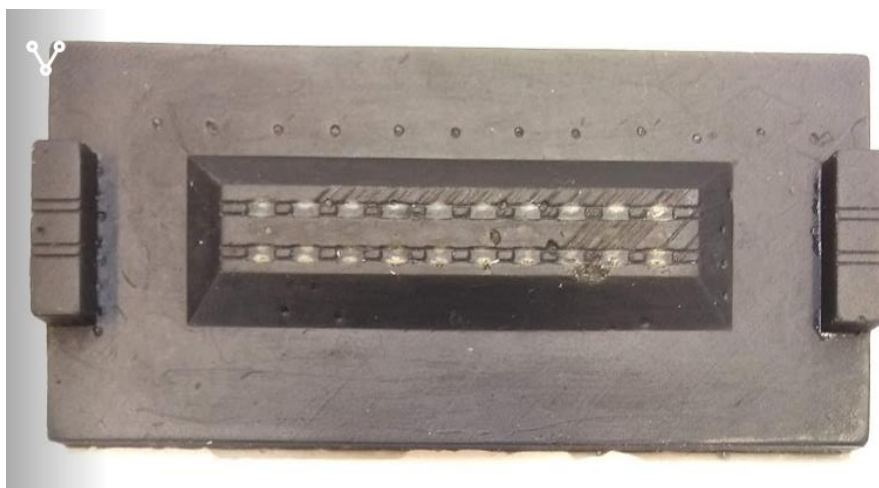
The mould employed for soldering ten solar cells onto a pair of Cu wires.
